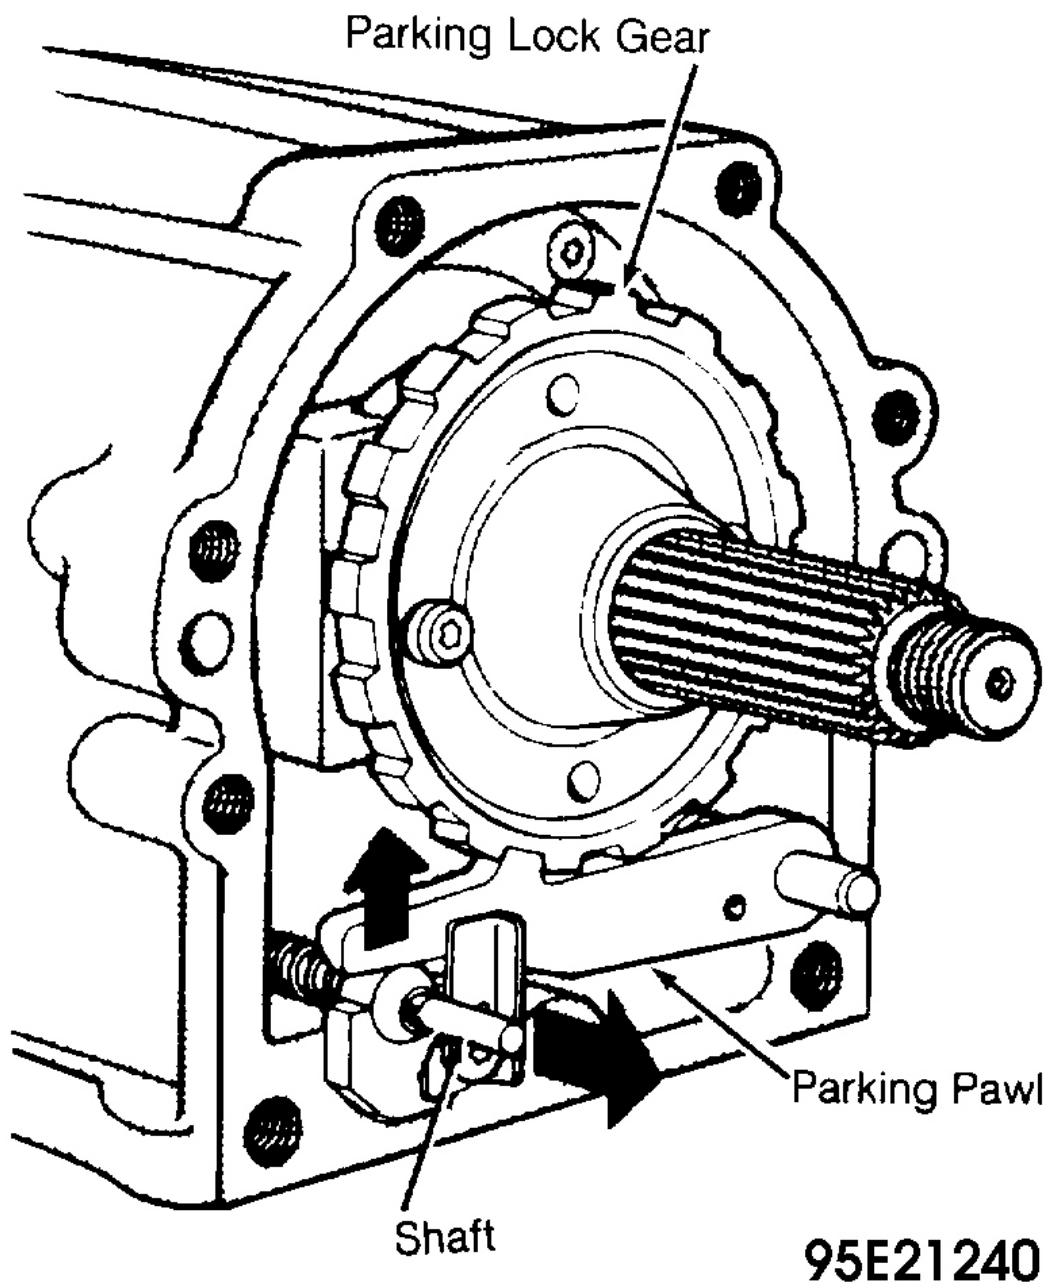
Identifying Parking Lock Gear, Parking Pawl & Components
